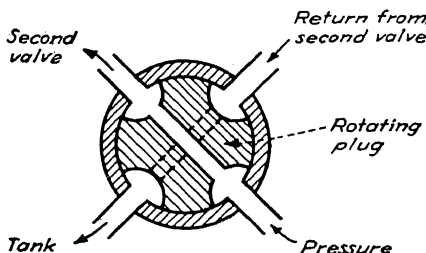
Plug-type 4-way pilot valve. (Courtesy of *Product Engineering*.)
